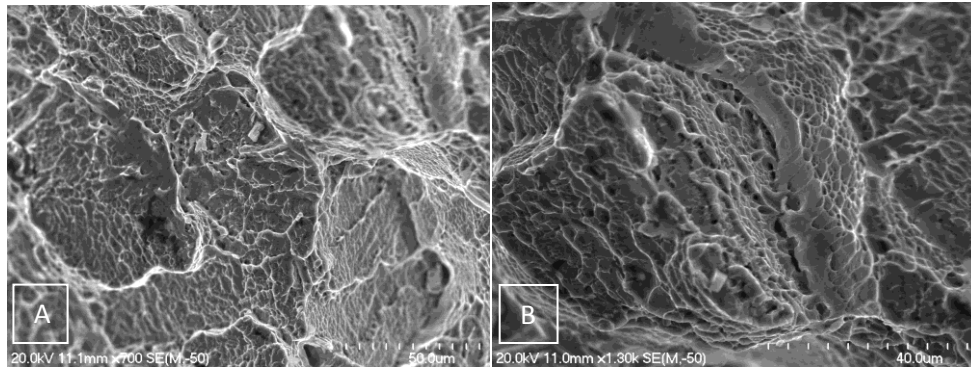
(A) shows the dimple rupture mode of fracture. (B) Large and small dimples on the fracture surface of laser sintered parts
